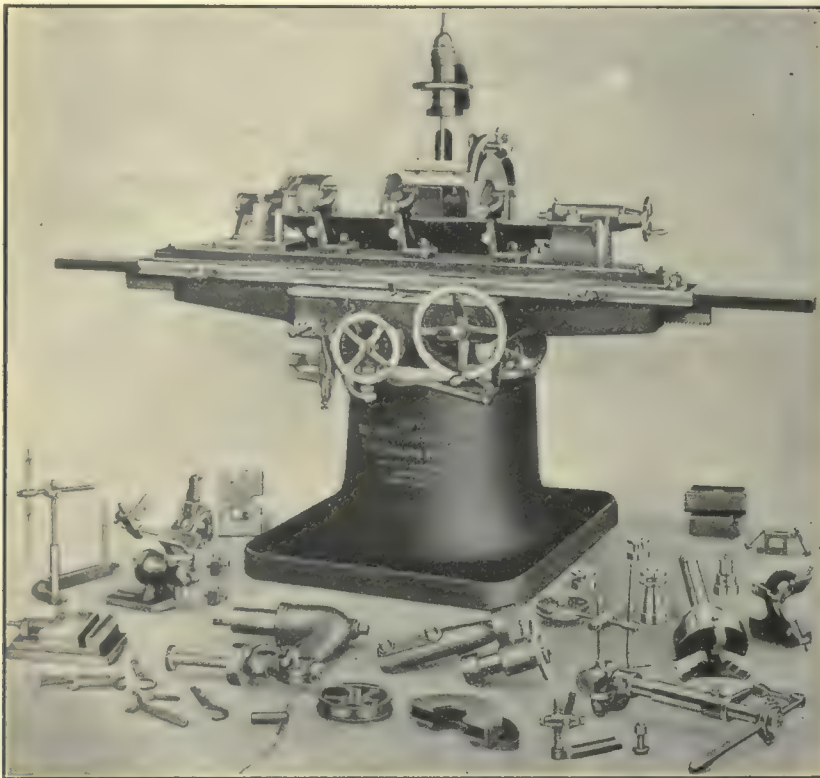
New 2½ Universal Bath Grinder with its Attachments.
